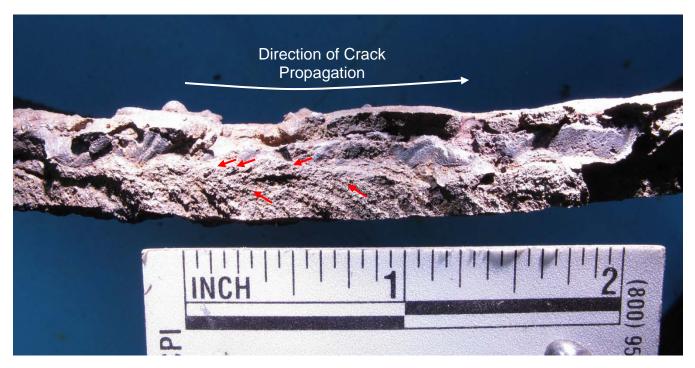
Example macrophotograph of the girth weld fracture surface approximately 150° clockwise from the true top of the pipe. The red arrows indicate lines on the fracture surface that point back in the direction of the crack origin.
